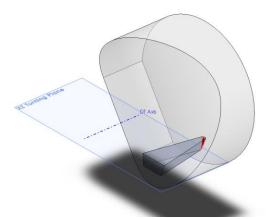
Example of a steep cylindrical lens surface (50° edge slope) being conventionally diamond turned via STS or FTS turning. Using a 12° clearance tool, the clearance face of the tool interferes with the lens surface.
